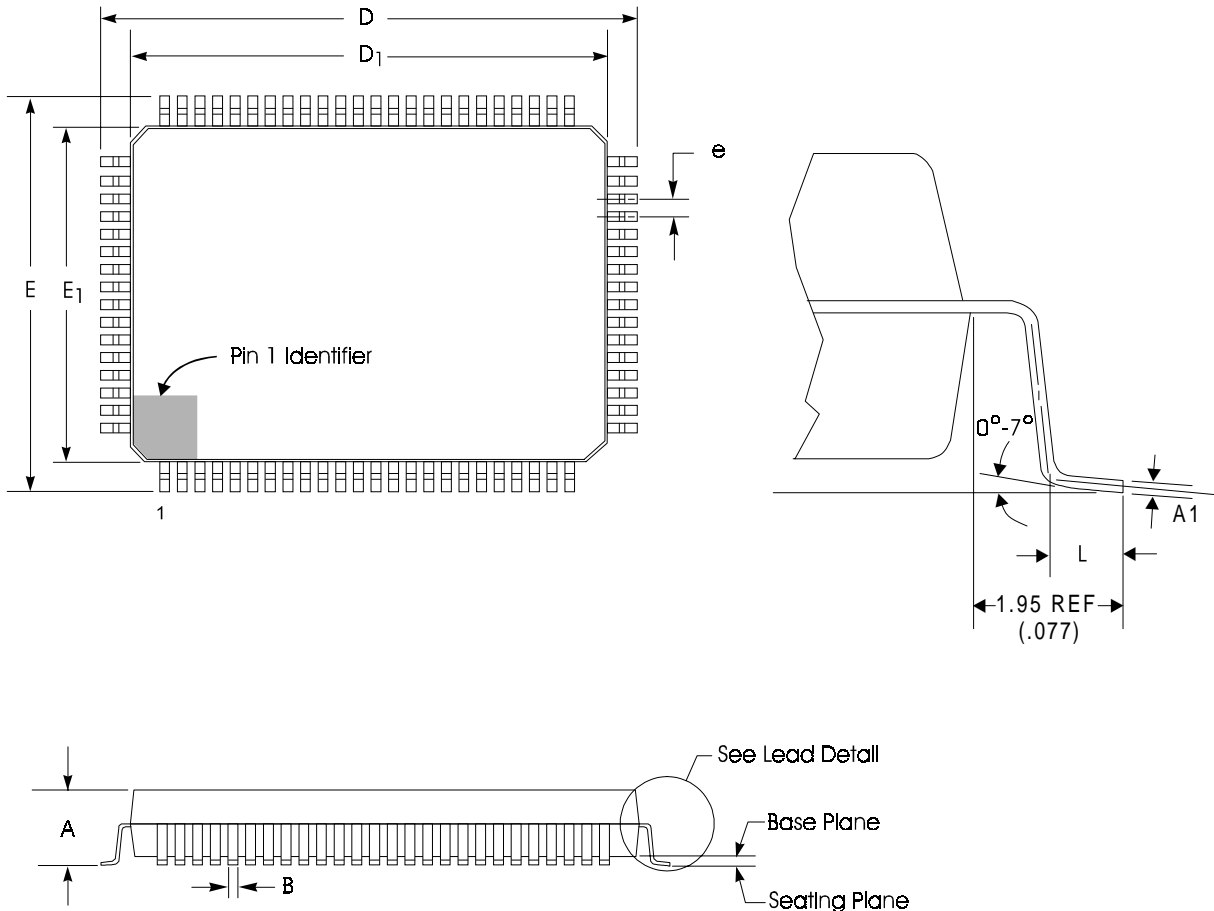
AIT1168 80-Lead Metric Quad Flat Pack (MQFP) Dimensions
